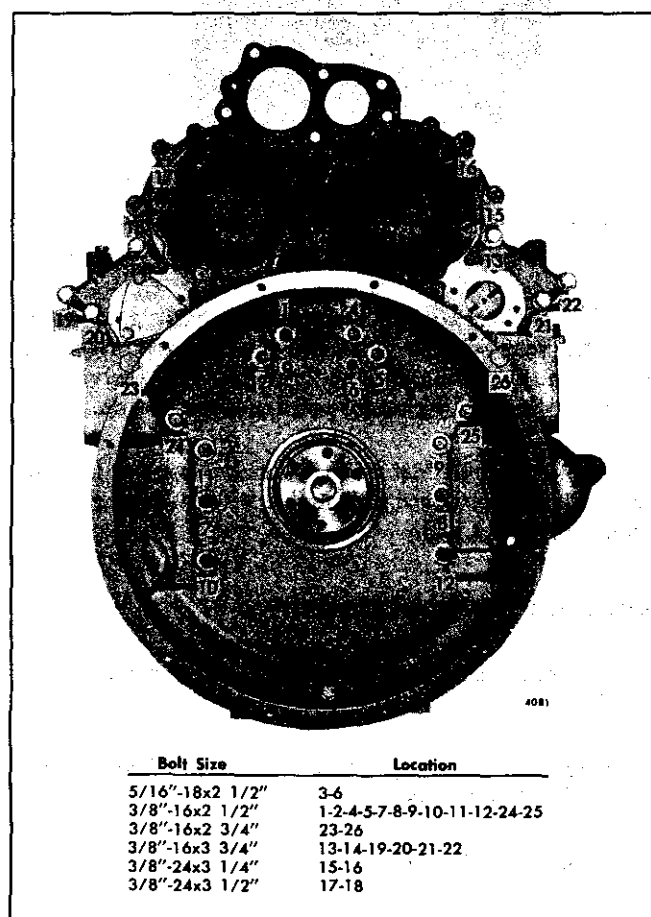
Flywheel Housing Bolt Sizes and Tightening Sequence (Operation 1)—6V Engine
